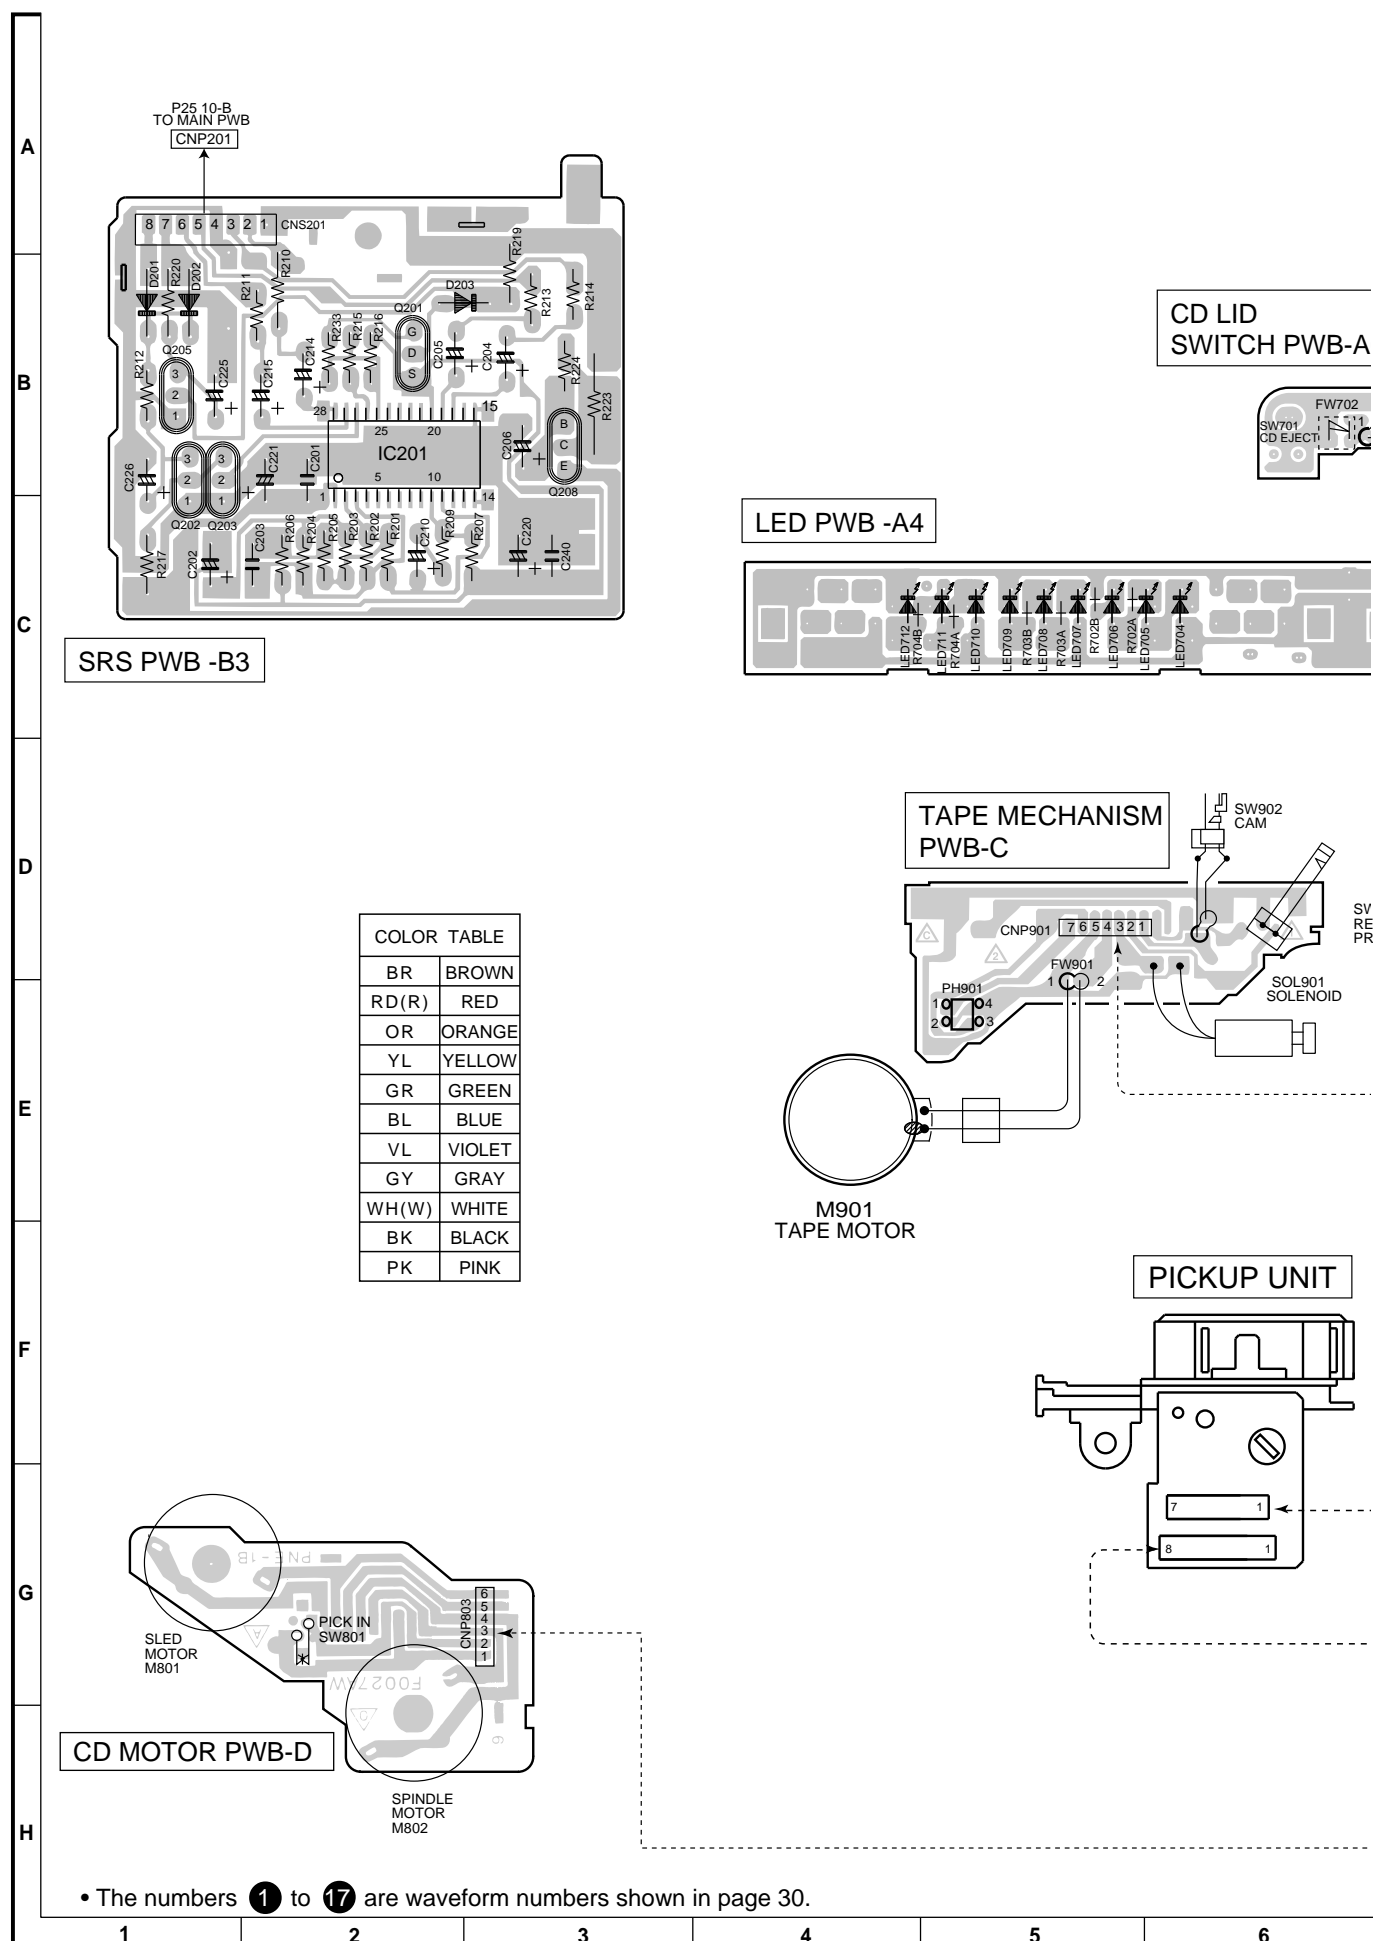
WIRING SIDE OF P.W.BOARD (3/4)
